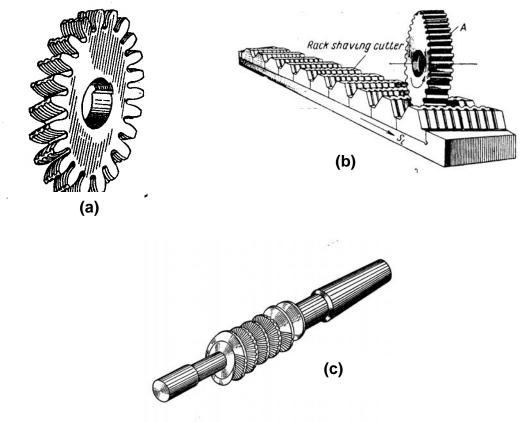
Gear shaving cutters of (a) spur gear type (b) rack and (c) worm type
